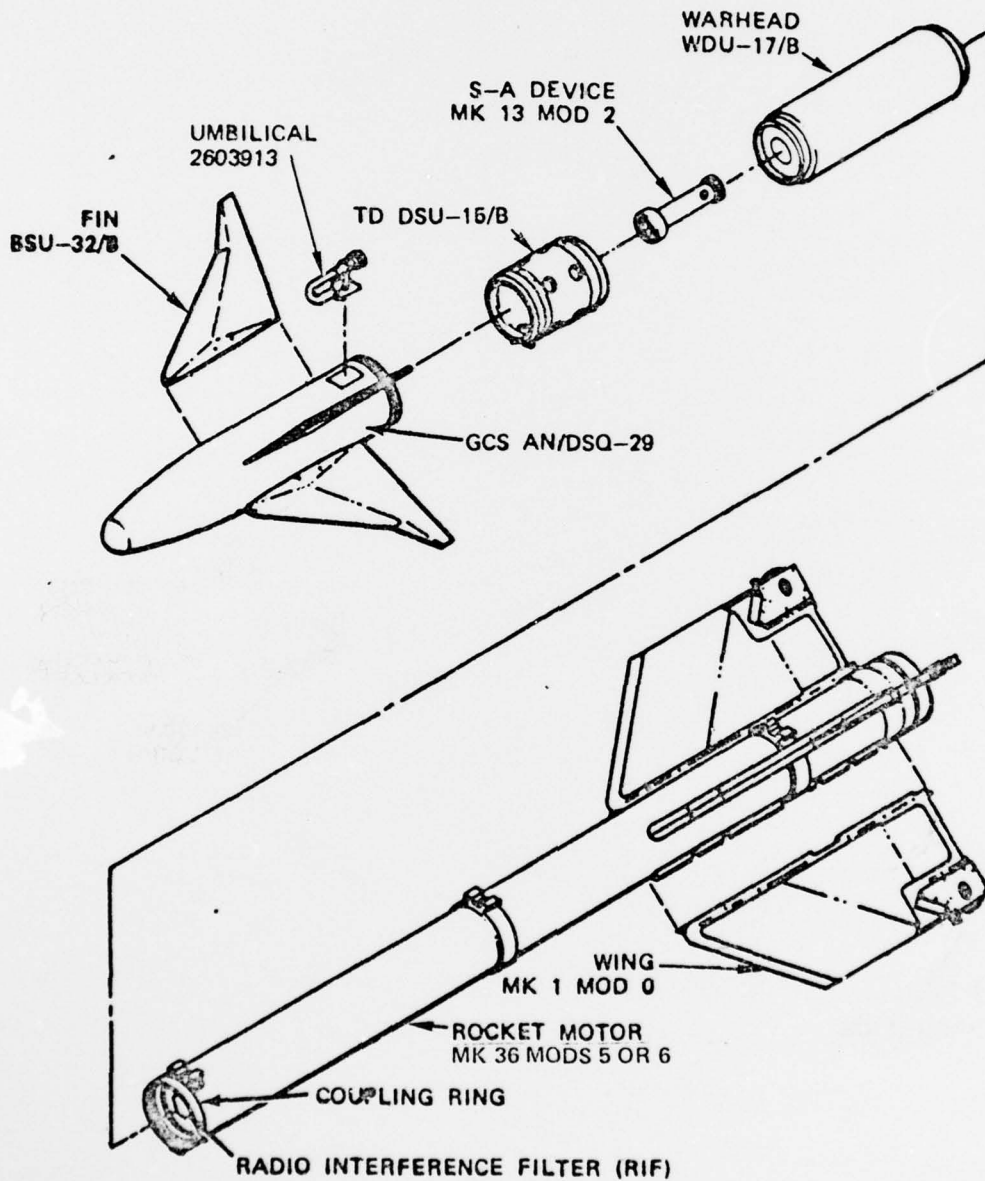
Sidewinder AIM-9L Guided Missile, Exploded View
